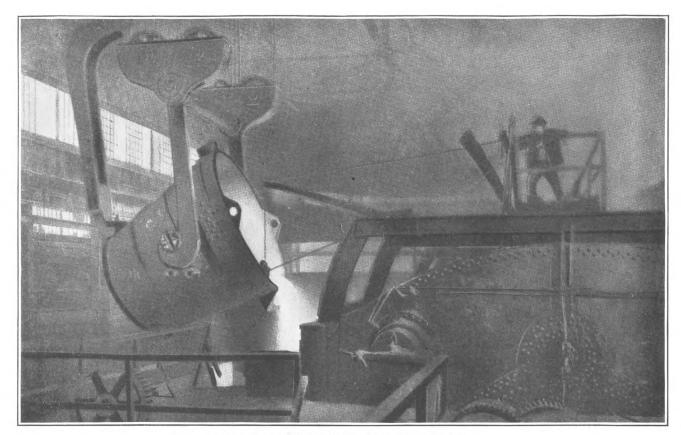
POURING MOLTEN IRON INTO MIXER,
